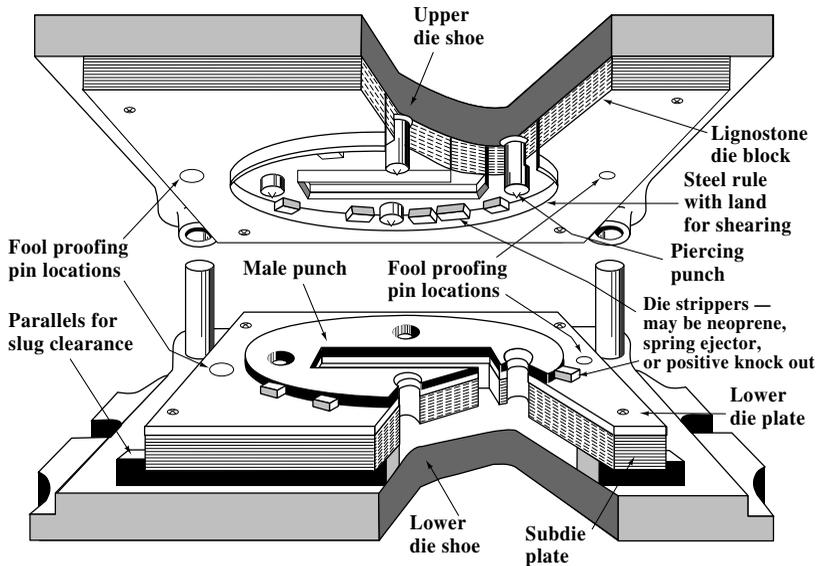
Steel Rule Die for Cutting a Circular Shape, Sectioned to Show the Construction
